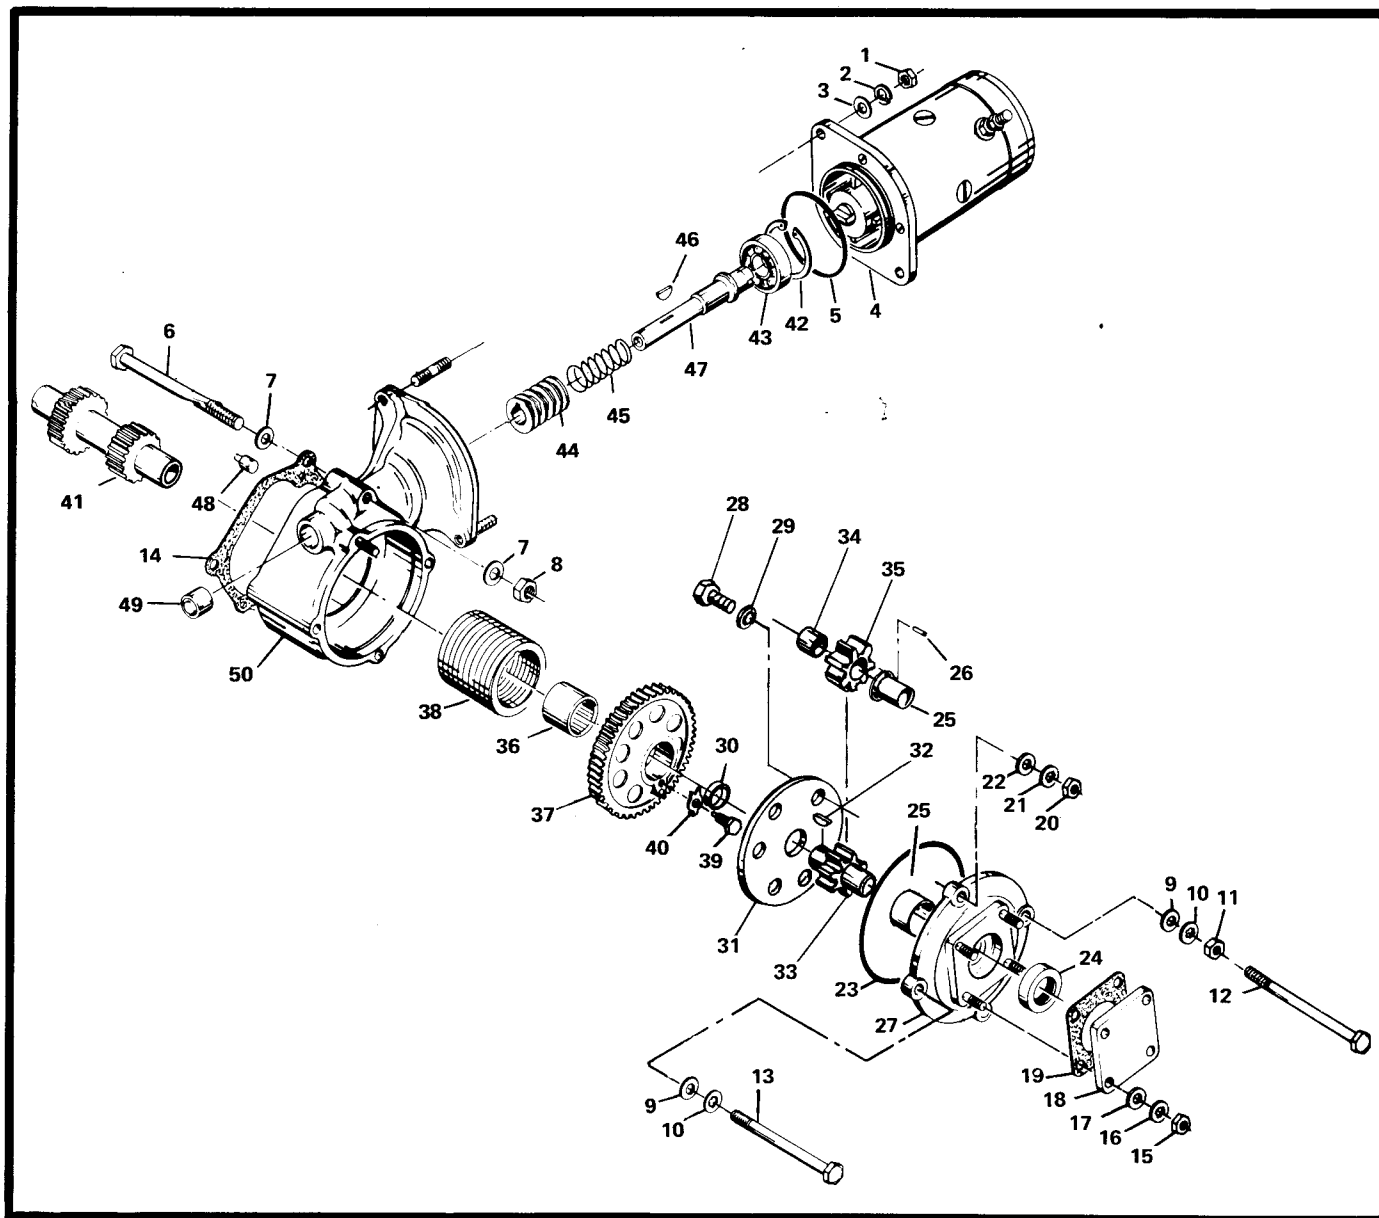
Starter Adapter for IO-360A, D and H & TSIO-360B, C & D.
